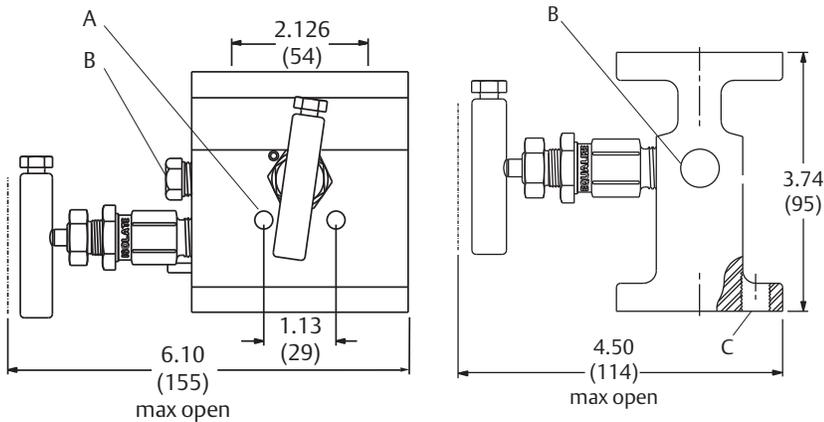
Rosemount 304RT 2-Valve Flange × NPT Conventional Manifold
